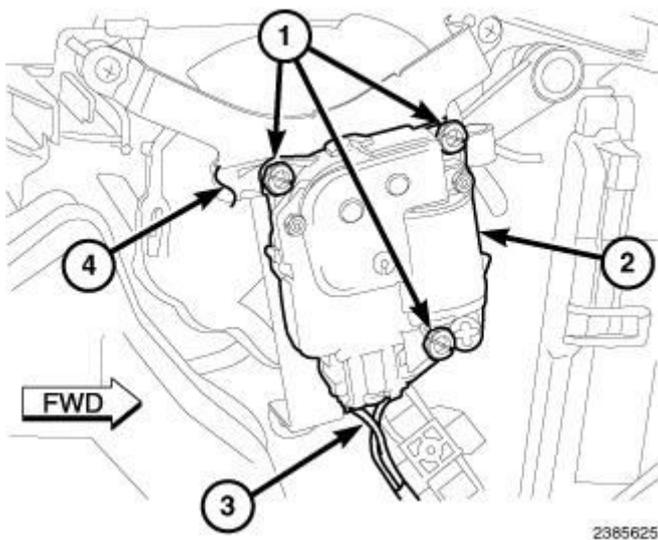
Mode Door Actuator, Connector, Bracket & Screws
